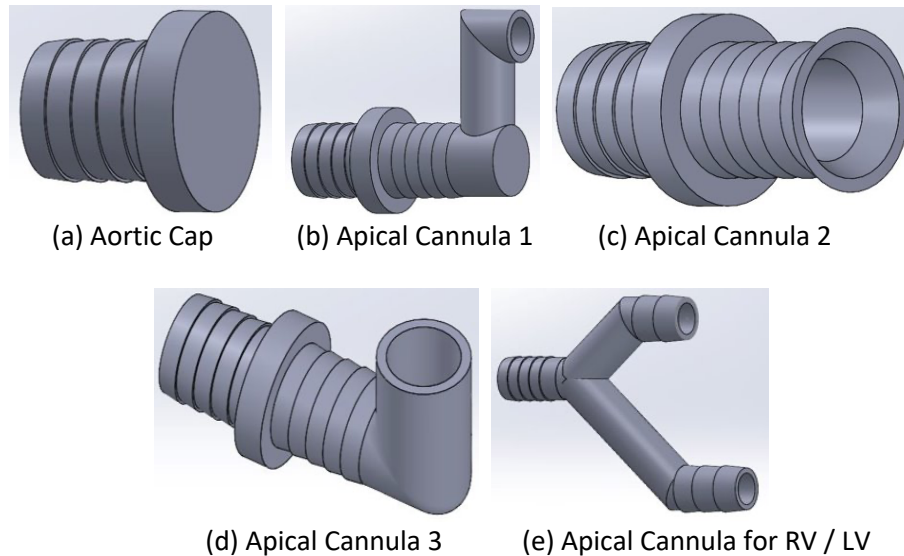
CAD model designs of 3D printed cannulas used throughout ex vivo testing.
